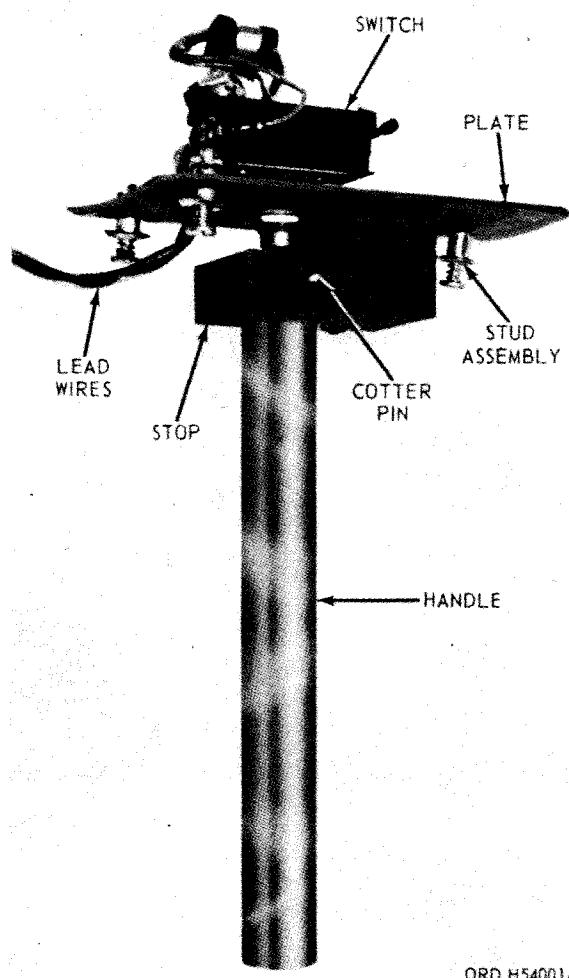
Ignition switch (rocket motor assemblies M3A1 and M3A1C).
